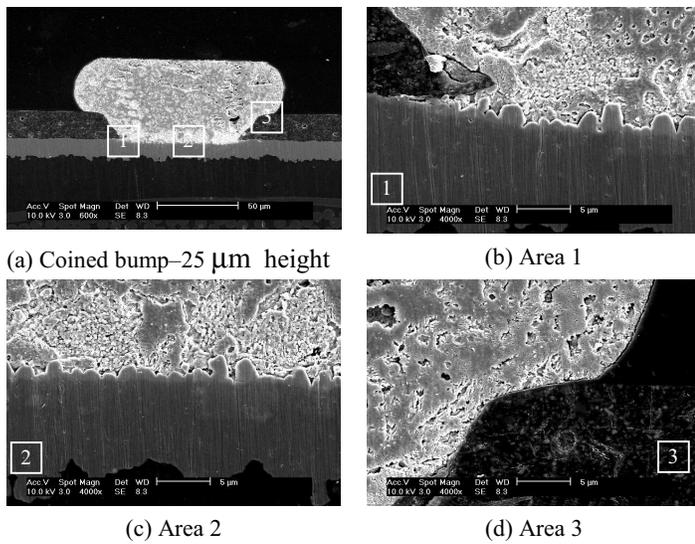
Cross-sectional SEM images of a coined PbSn solder bump on OSP finished PCB
